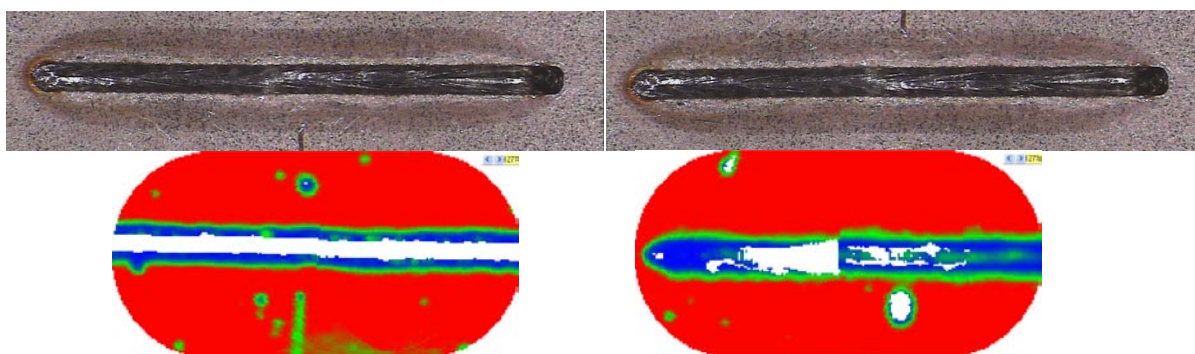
Weld top bead (0.2mm gap, sample B) and Amstech result from top bead (L) and bottom bead (R)
